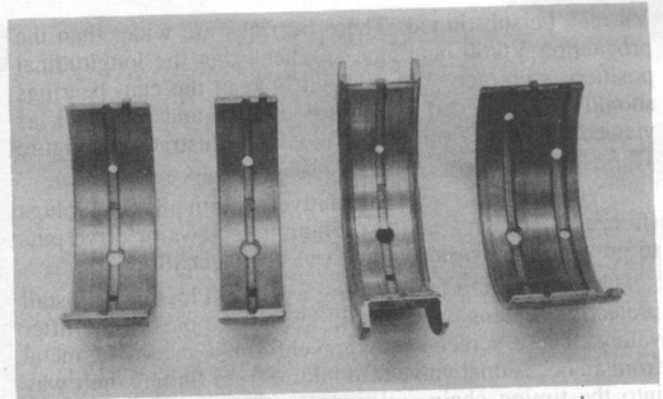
Drill additional oil holes in upper main bearing inserts.
